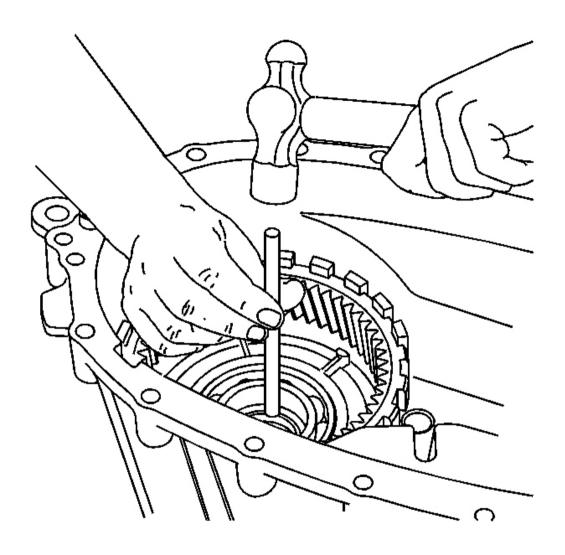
Identifying Input Seal Courtesy of GENERAL MOTORS CORP.
